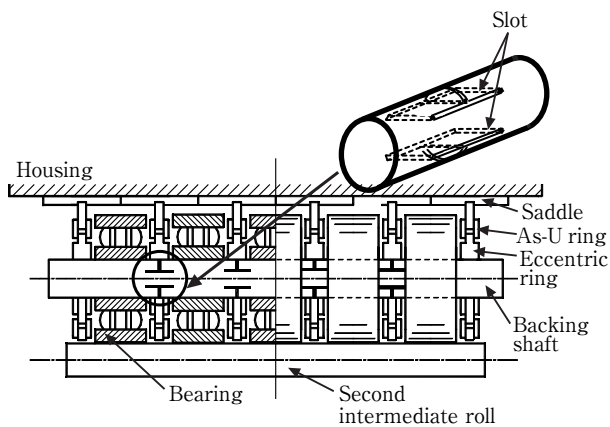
Outline of FSBA (Flexible Shaft Backing Assemblies).
